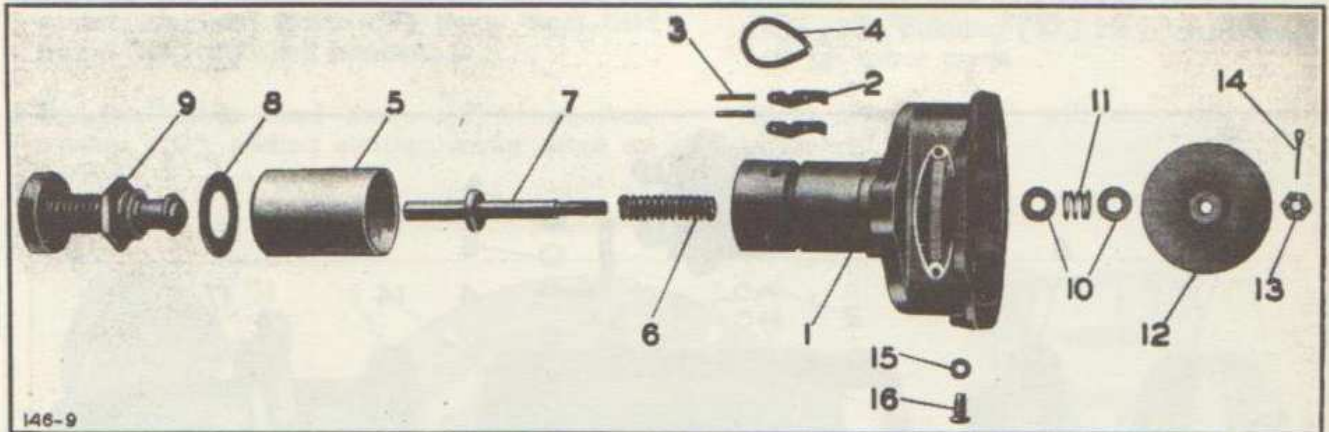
Exploded View of Parallel Switch Housing, Push Rod and Contact Assembly
